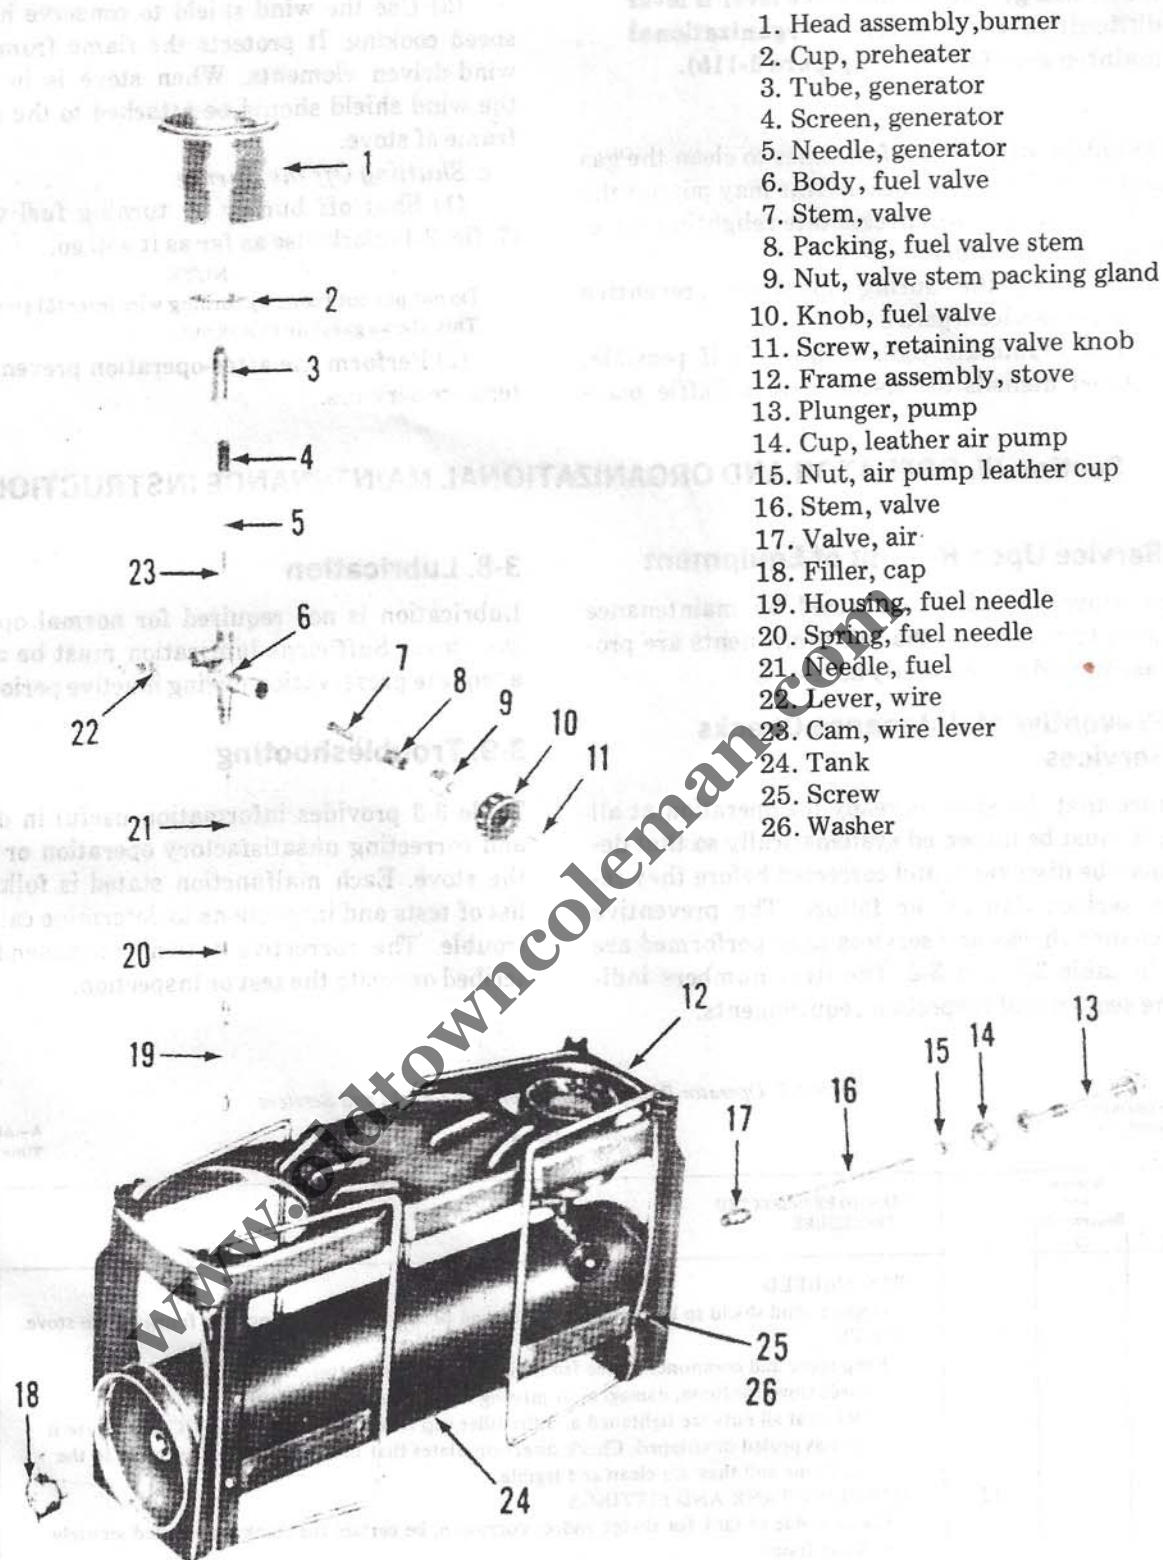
Burner head, generator, fuel valve, pump plunger, and air valve and stem assemblies, exploded view.
